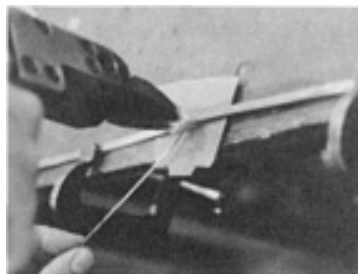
PORTABLE ELECTRICAL RB ELECTRODES USED TO JOIN A WIRE TO A PLATE. COURTESY OF ROBIN
